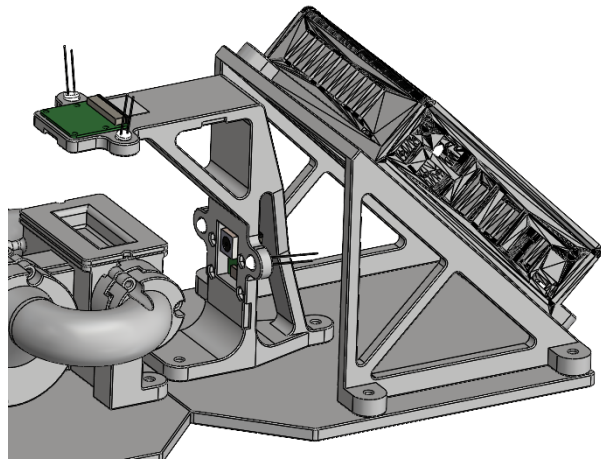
"Camera Tower and Jetson Mount" assembly.
